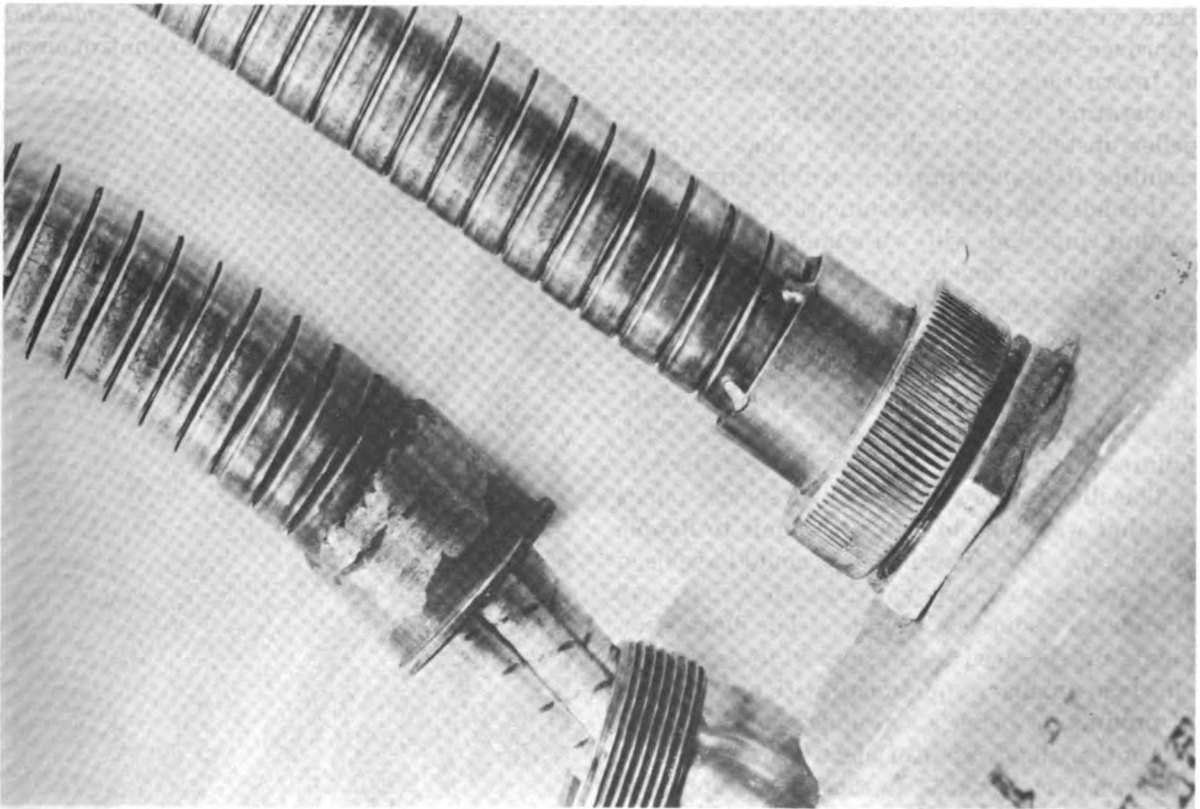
Failure of spot welded ferrule attachment.
